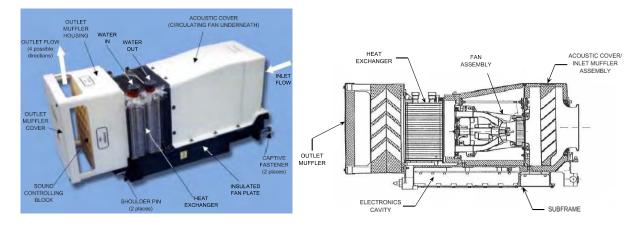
ISS Avionics Air Assembly fan and packaging.
